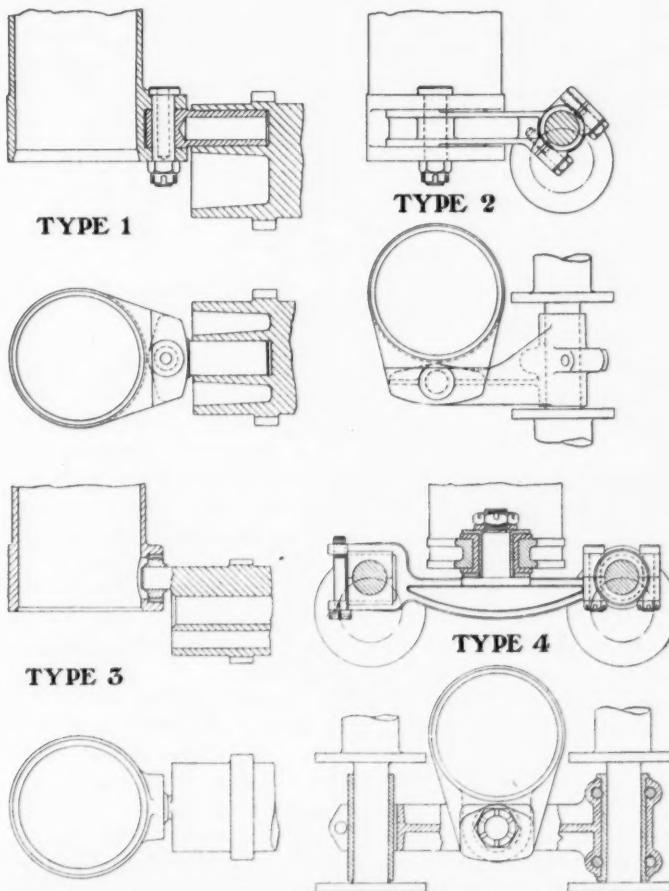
Four types of actuating gear used in Wallace single-sleeve valve engine
